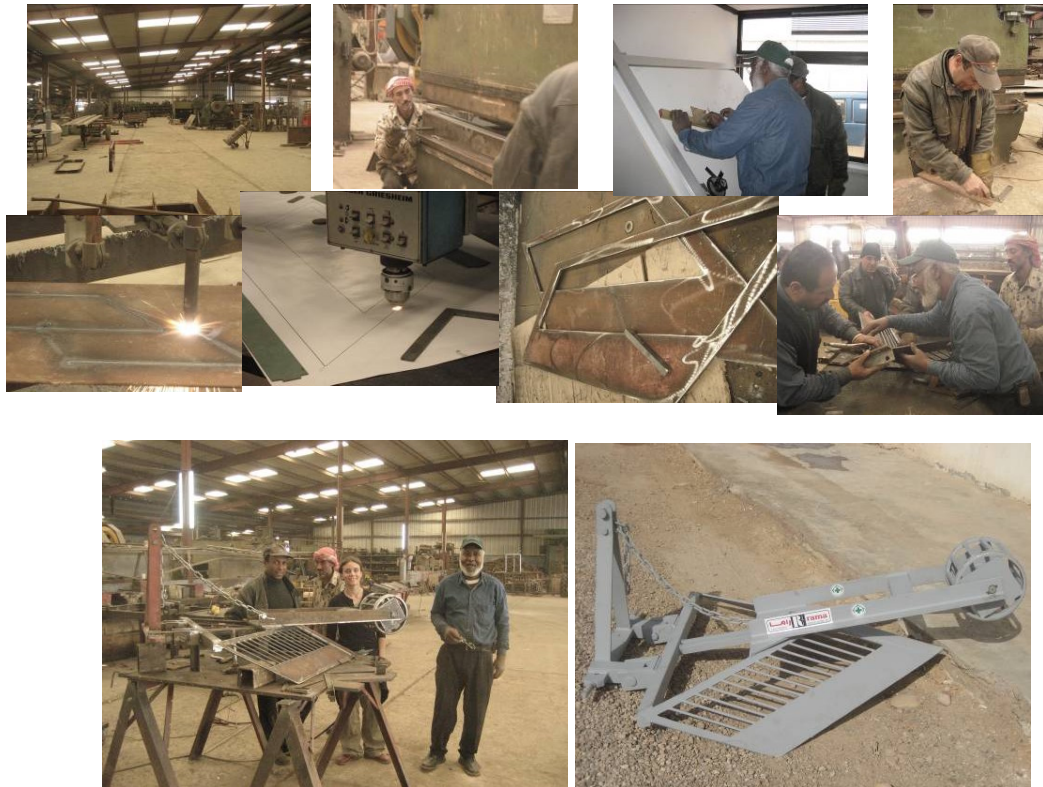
Ground processing tool manufacturing phases and final prototype.
